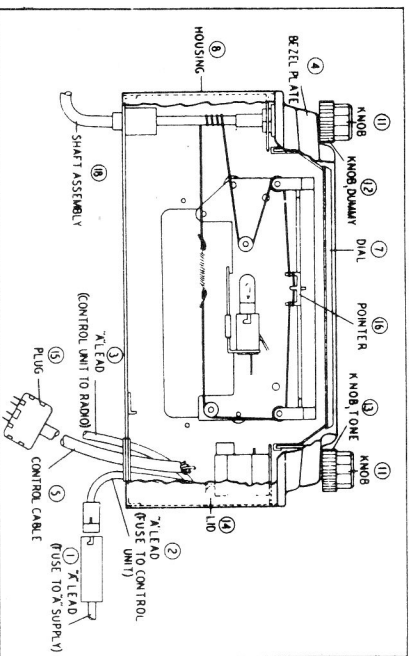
Control Unit C600M (Under Dash), Showing Location of Parts and Dial-Cord Installation Details
